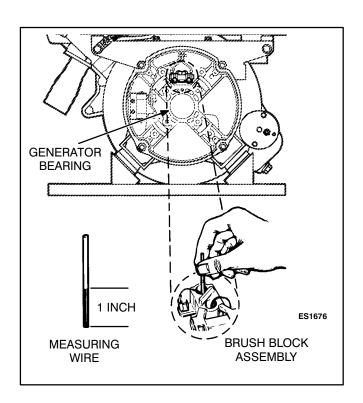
CHECKING GENERATOR BEARING AND BRUSH BLOCK
